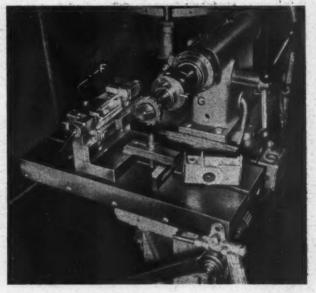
The surfaces of four bosses on top of the camera casting are machined flat with a combination of conventional and special milling cutters on this Paatz machine, which employs a spindle housing similar to that on the machine in Fig. 3
